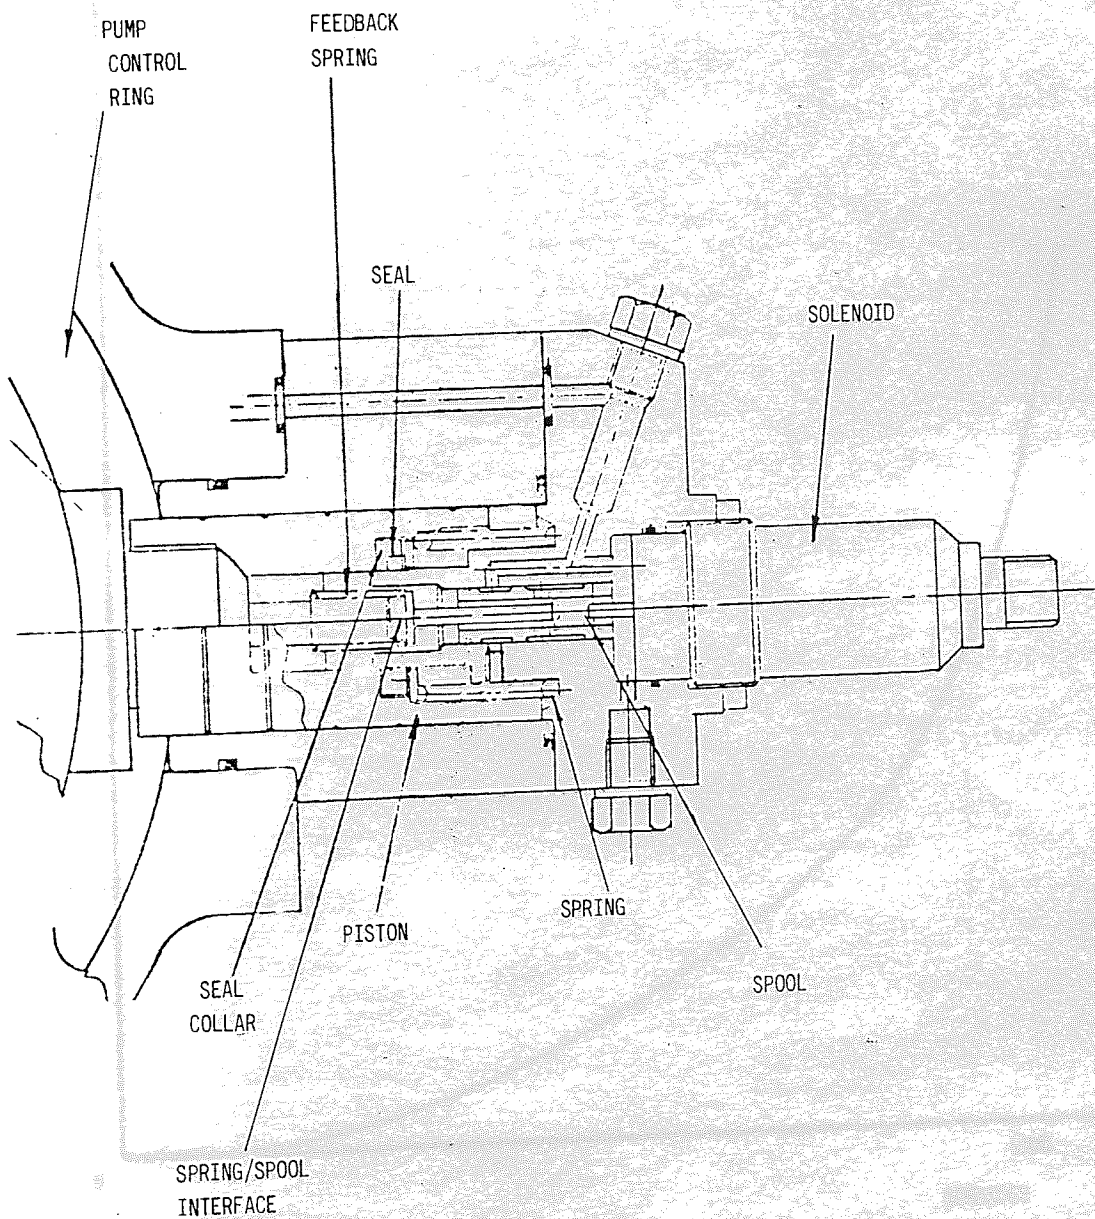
AN ASSEMBLY DRAWING OF THE SOLENOID
